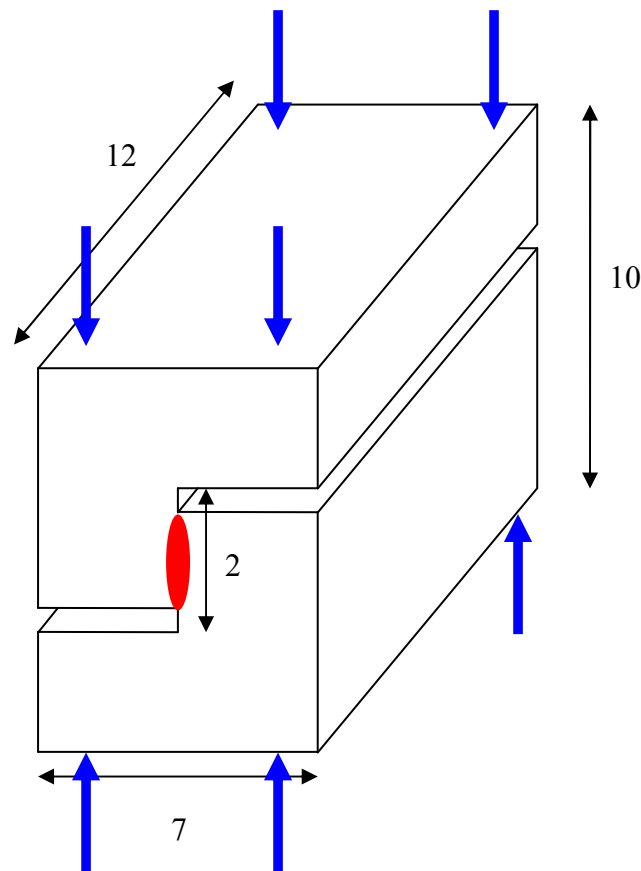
Shear Strength Test Specimen Geometry (all dimensions in mm)
